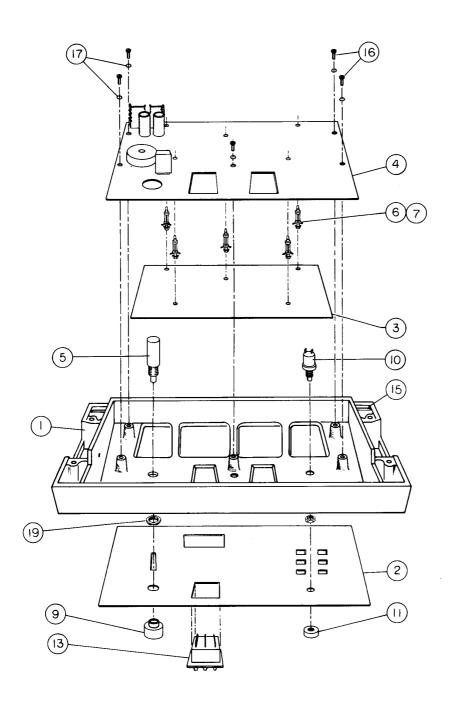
PARTS LOCATION DIAGRAM, MODEL C82 CONTROLLER, FRONT PANEL
